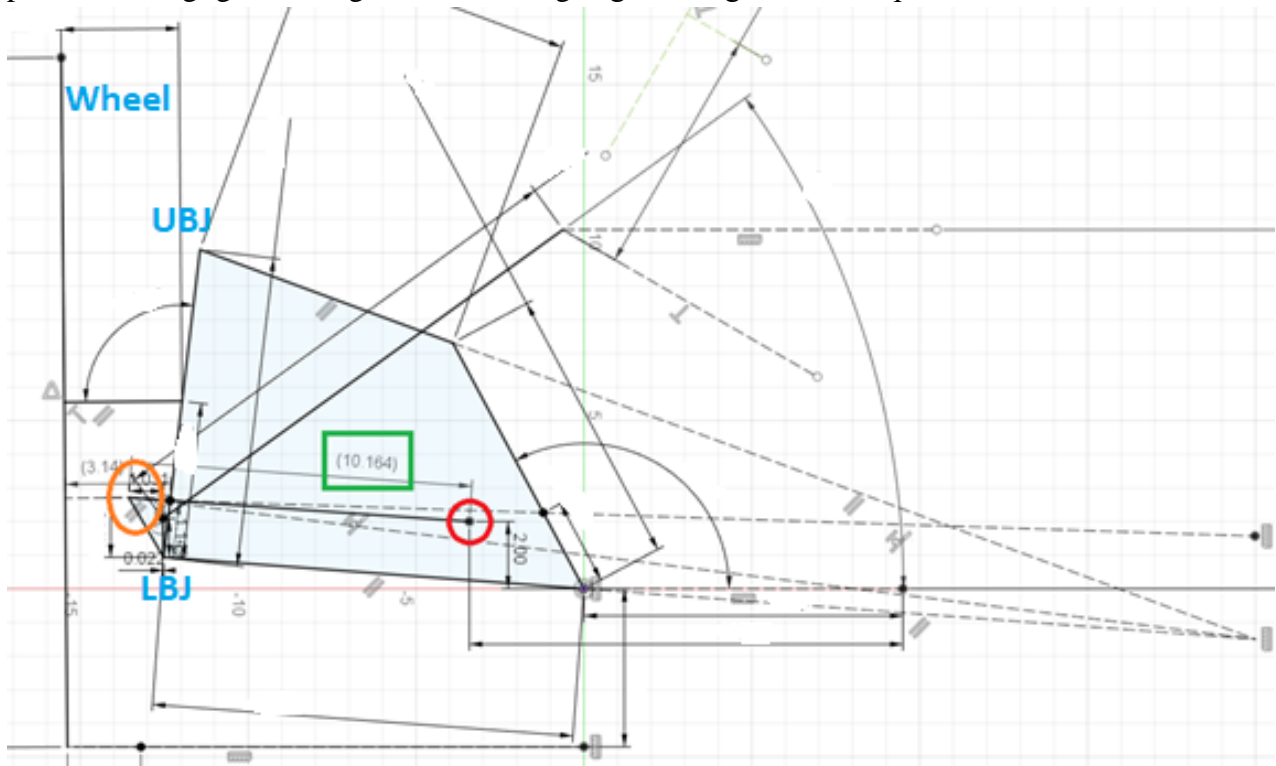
Virginia Motorsports’ FSAE car’s RWS bump steer analysis. Side view of suspension geometry shown.
